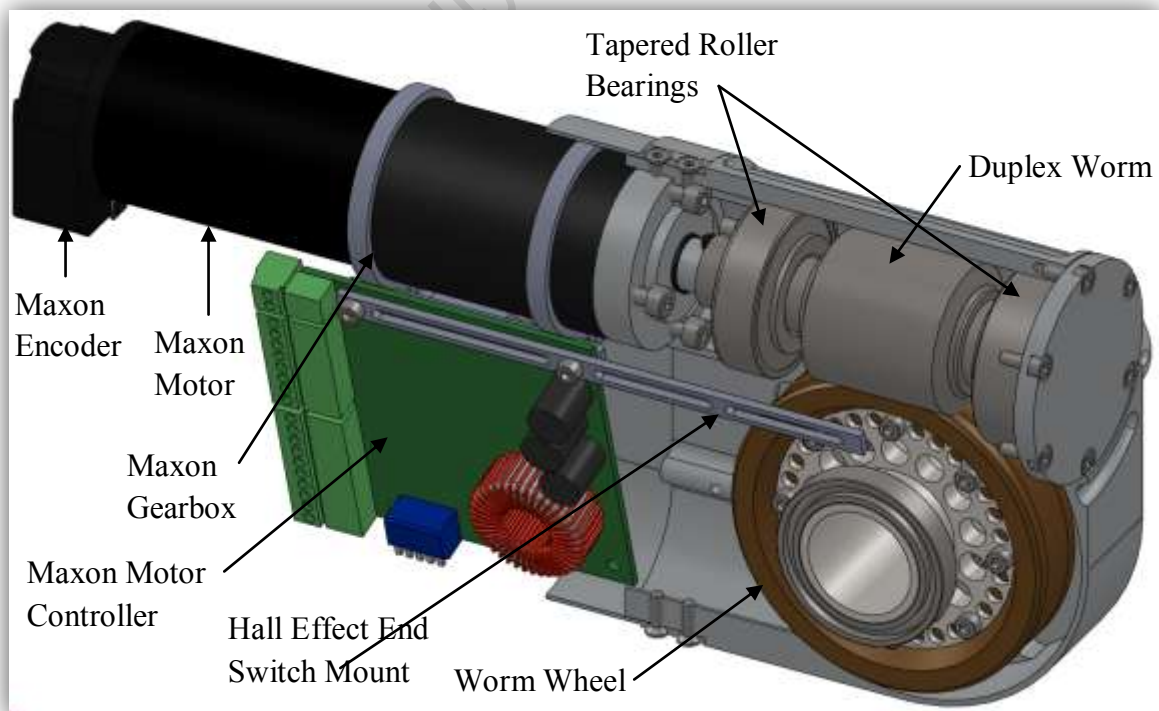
Cutaway of Gearbox Housing showing the Internal Components
